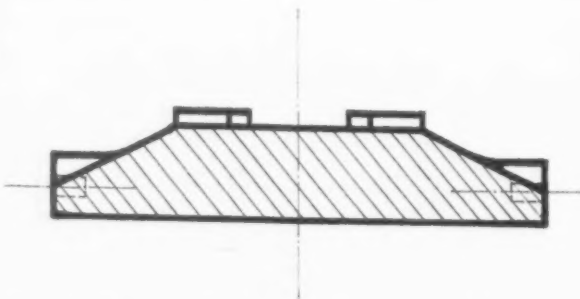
Ingot Mold Stool Used for Top Pouring of Ordinary Ingots. Material: Cast Iron
